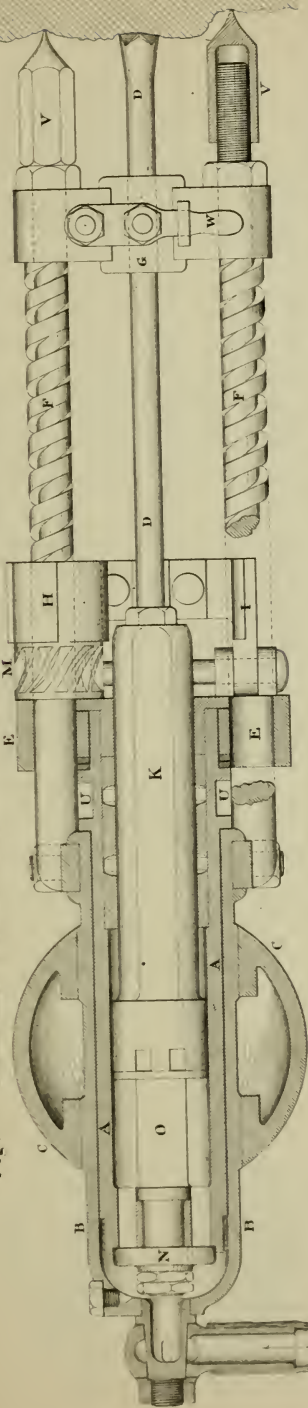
Longitudinal Section, showing Boring Tool at end of Return Stroke.
